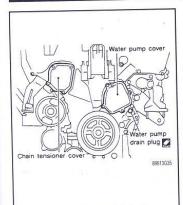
Water pump and chain tensioner cover locations-VQ30DE engine
